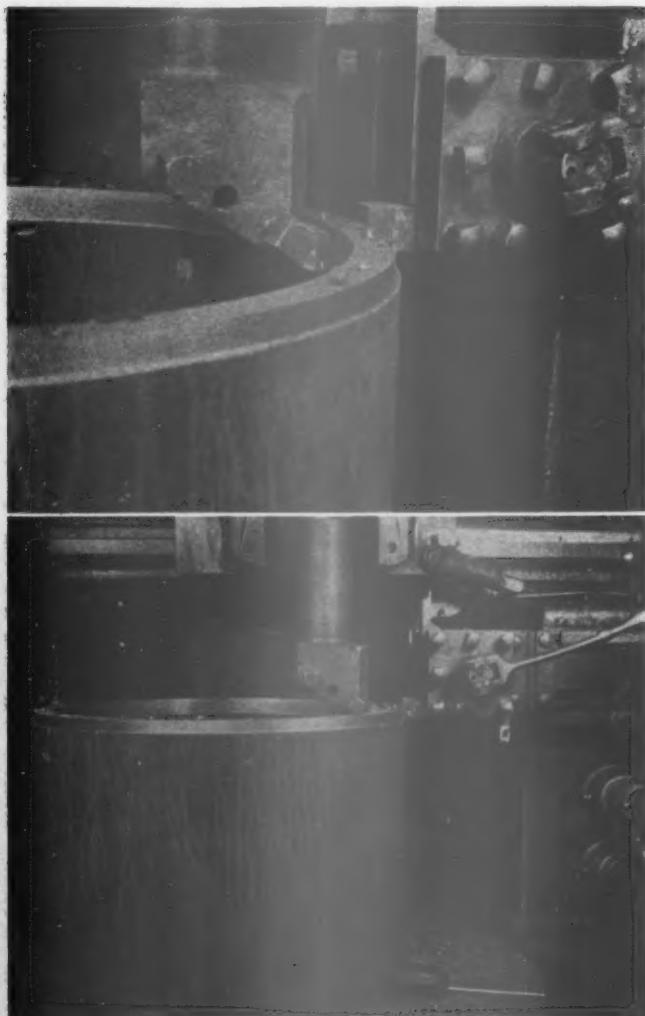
Two views of the turning and boring tools starting the two-cut operation on a rough tub
